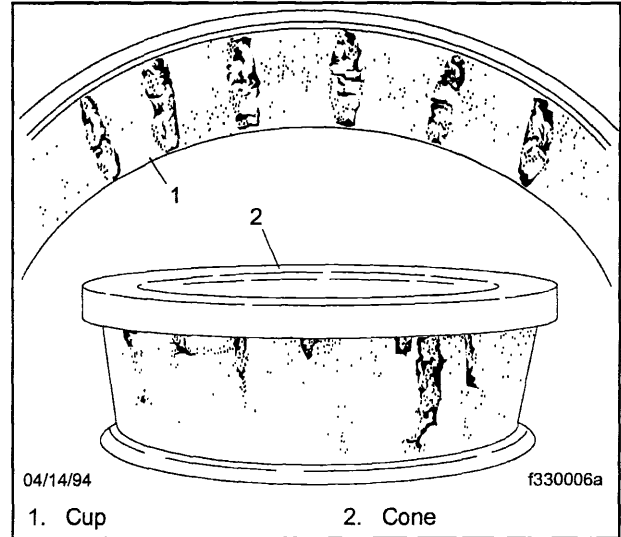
, Spalling (Flaking) of Wheel Bearing Assembly
